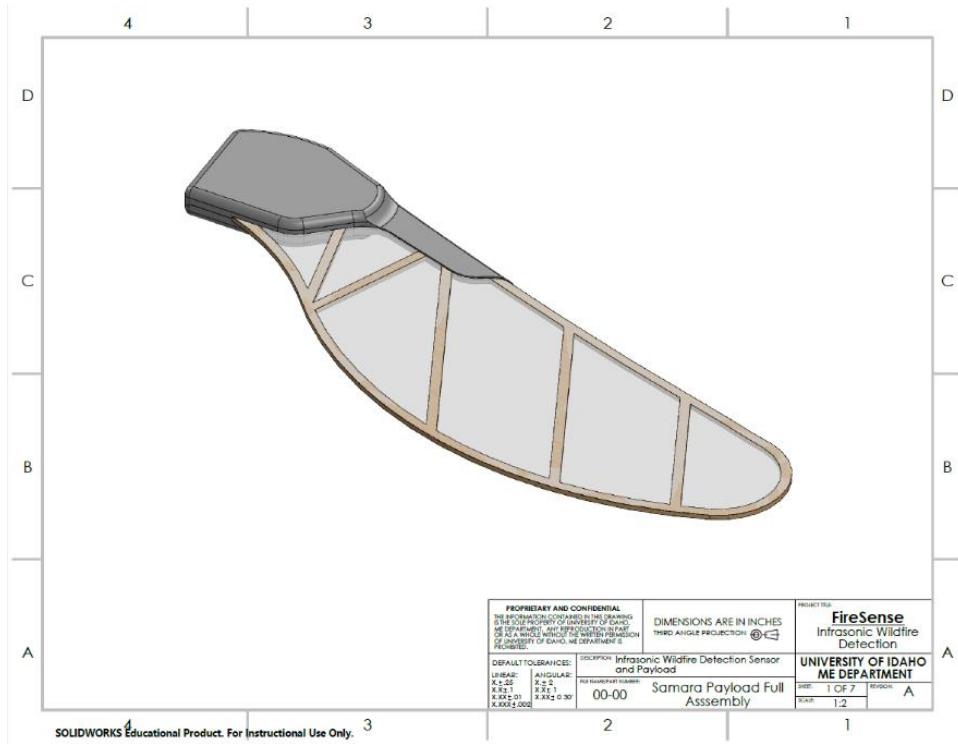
Technical Drawing Package Sheet 1, Full Assembly
